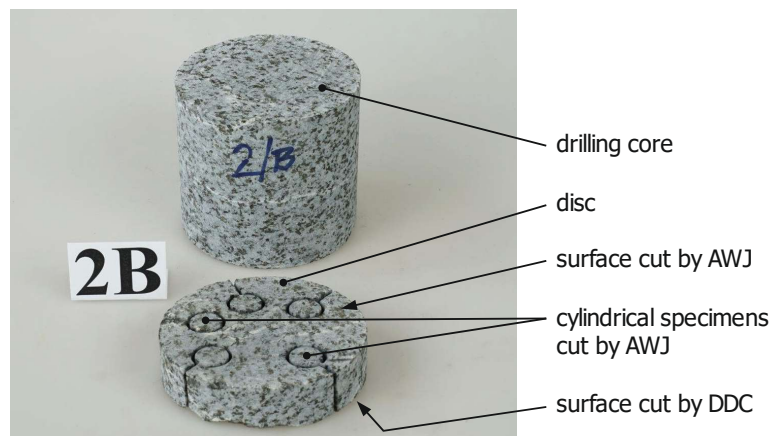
Preparation of cylindrical testing specimens cut from source disc of rock drilling core
